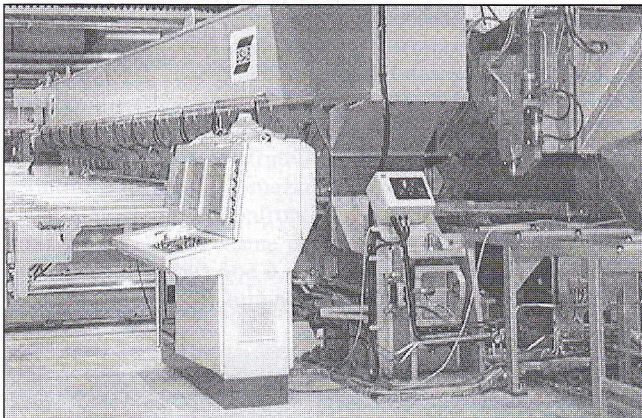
Side view of the new long-length FSW machine capable of welding 14,5 meter long panels.
